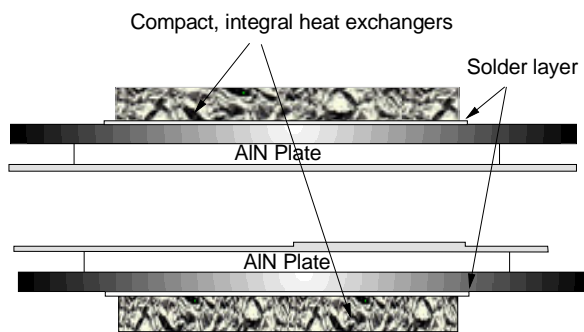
Heat Exchangers are solder attached to upper and lower base subassemblies
